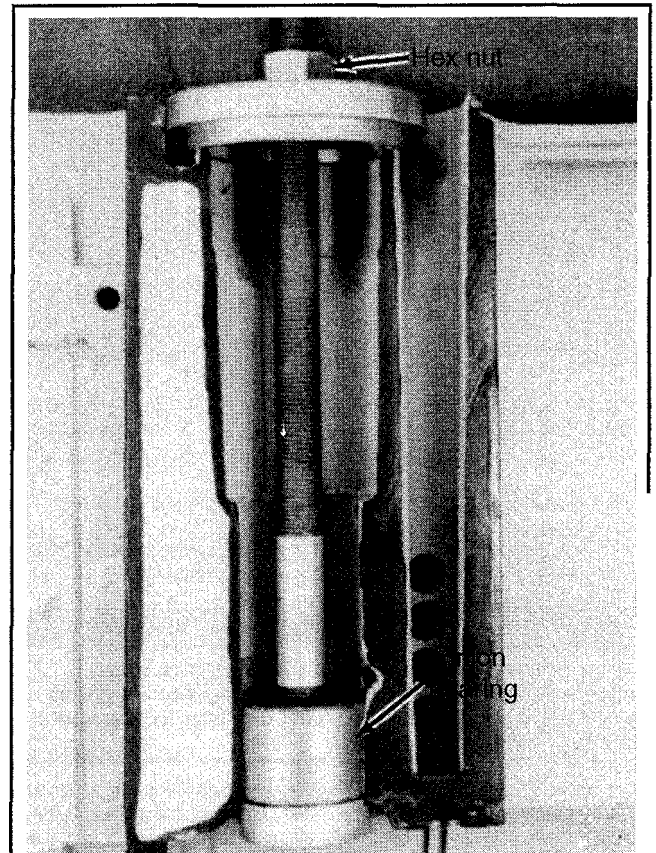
Cut-away view showing puller positioning for pinion bearing removal, the bearing MUST be pulled upward to safely remove it from the gearcase on V6 and V8 models
